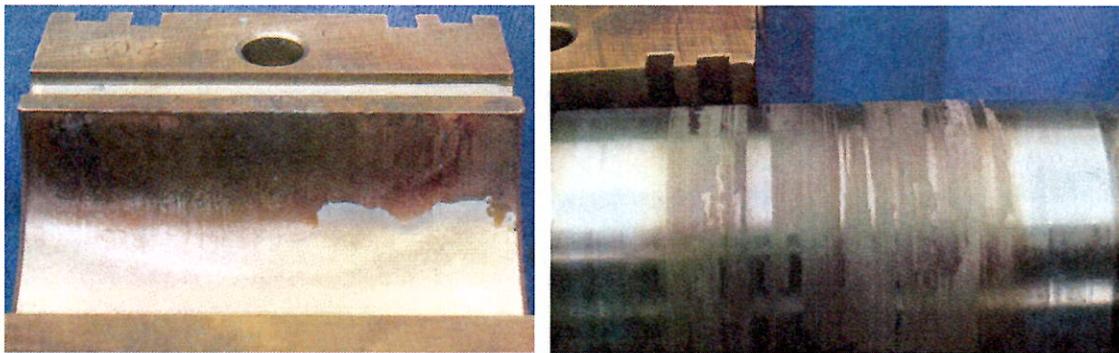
Varnish Formation on Plain Bearing and Shaft
